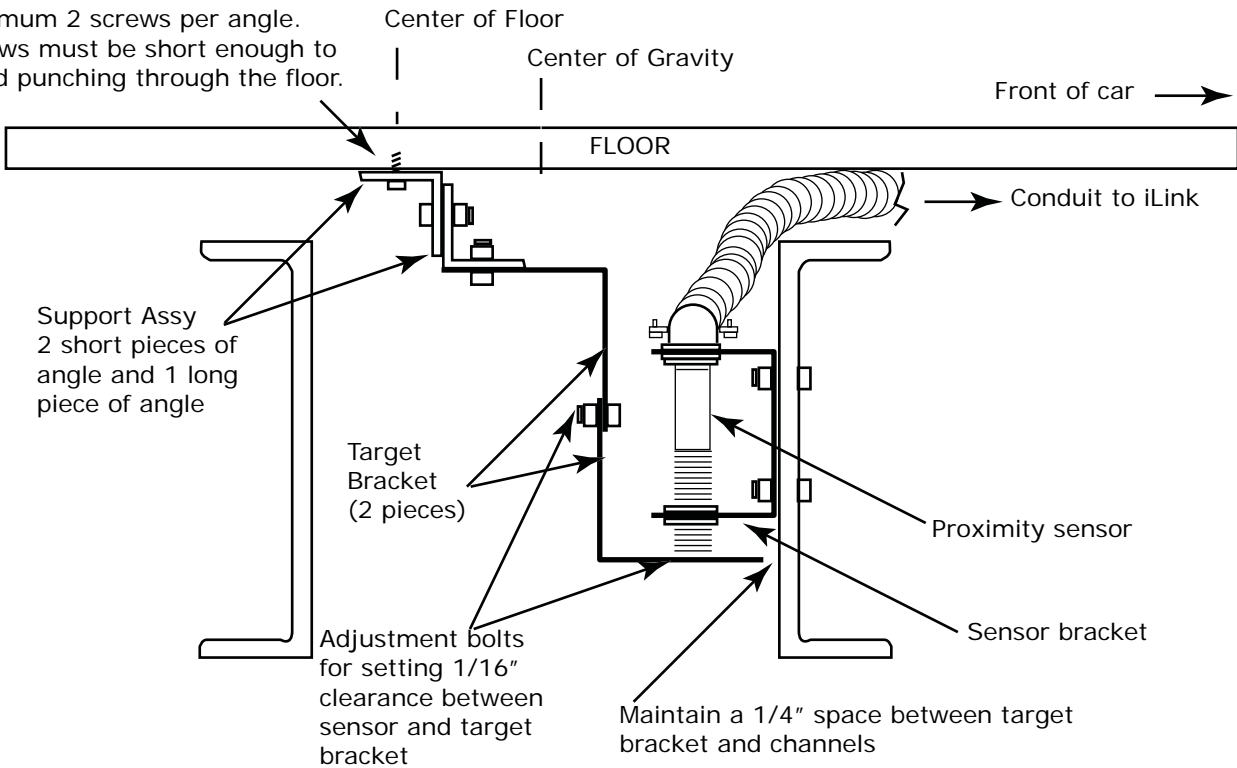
Target Bracket and Sensor mounted on Support Assembly and Car frame
